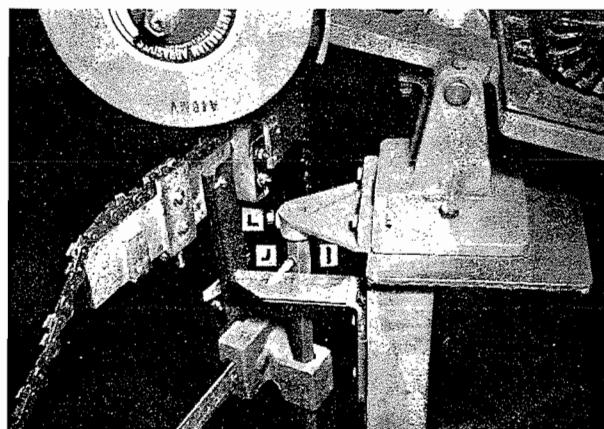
Side view of gulleting machine showing scale for front bevel adjustment.
